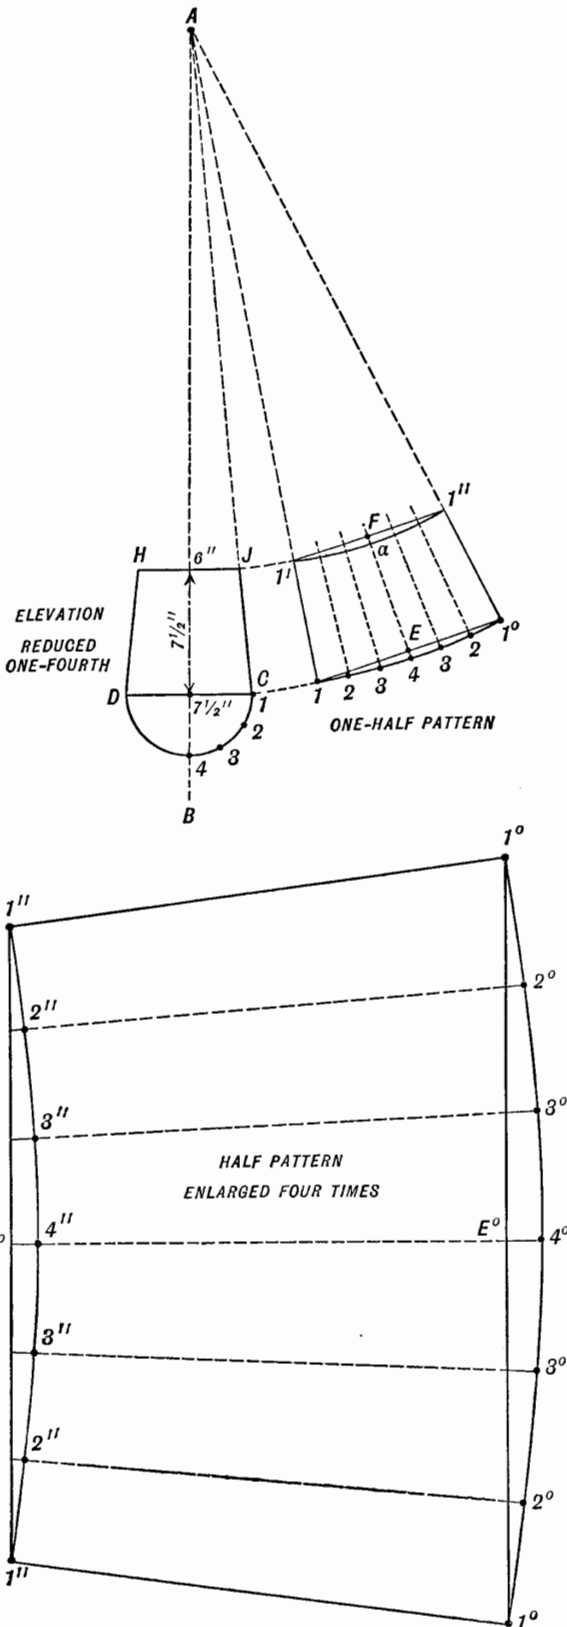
Finding Full Size Pattern for Reducer by Means of Reduced Drawings
